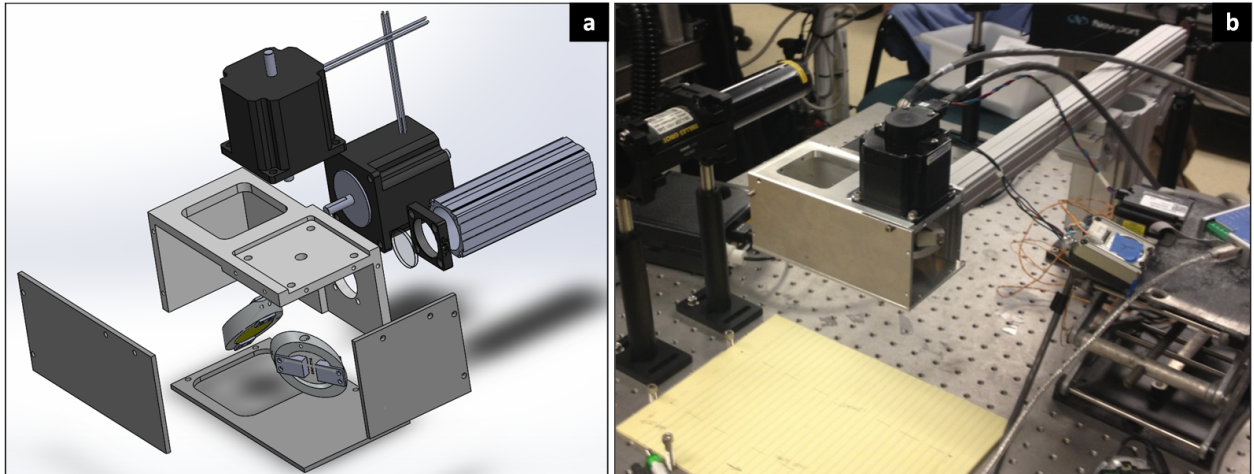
Nd:YAG Scanning Head. a) Exploded CAD drawing b) Assembled scanning head.
